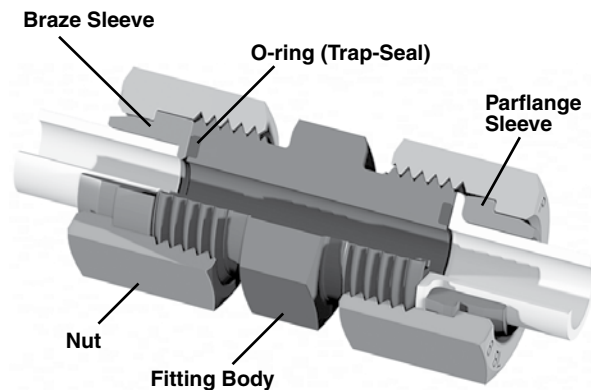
Seal-Lok Union cutaway with flanged and brazed assemblies
